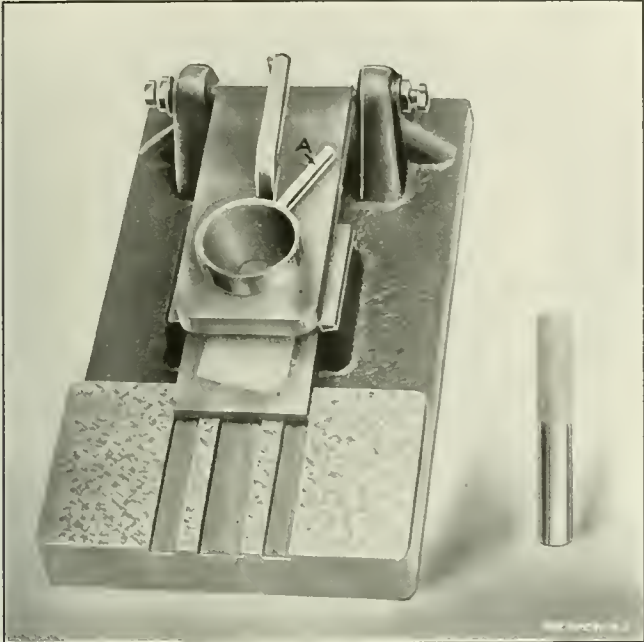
Jig for Molding Wax Formers for Engraving Pearl Handles
